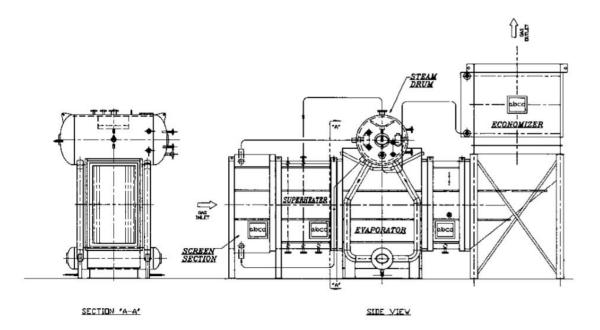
Front View and Side View of a Water Tube Boiler Equipped With Economizer and Superheater (V. Ganapathy, 2003)
